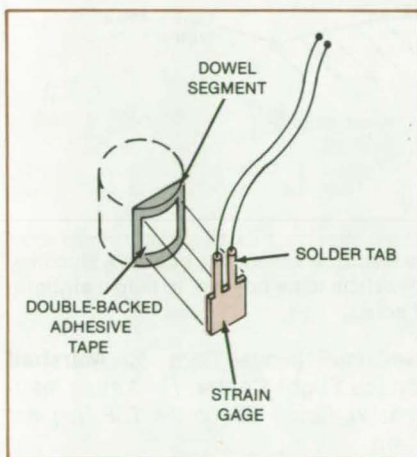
The Strain Gage Is Attached to a segment taken from a large cylindrical object. The segment is wider and longer than the gage and conforms to the shape of the bolt hole. A piece of tape with adhesive layers on both sides holds the foil gage against the surface of the segment.
